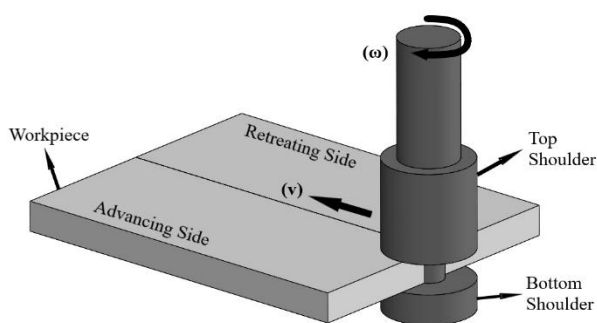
Schematic of the Bobbin Friction Stir Welding process
